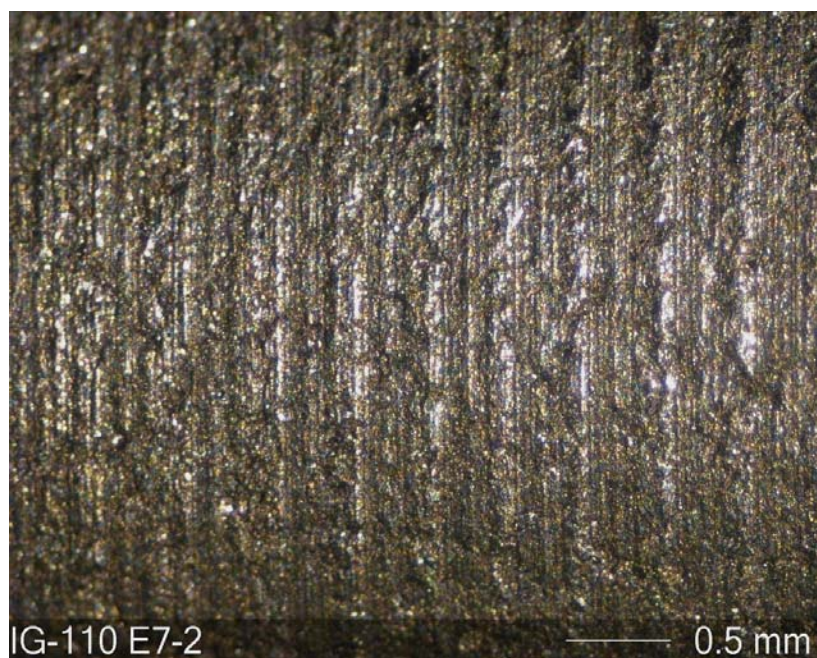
IG-110 specimen E7-2 macrograph showing surface roughness and machining marks
